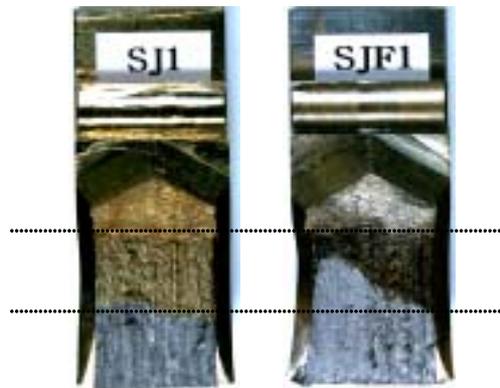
Fracture surfaces of the J-R test specimens
